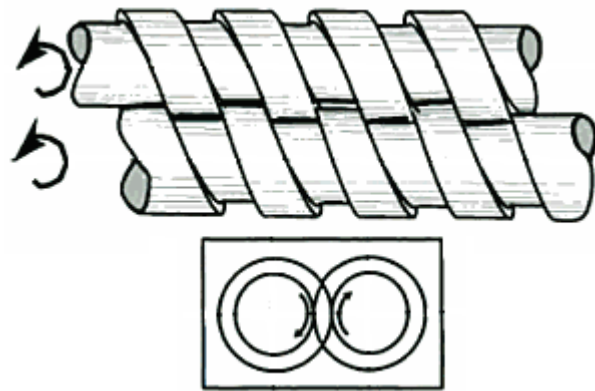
Fully-intermeshing co-rotating twin screw extruder [3]
